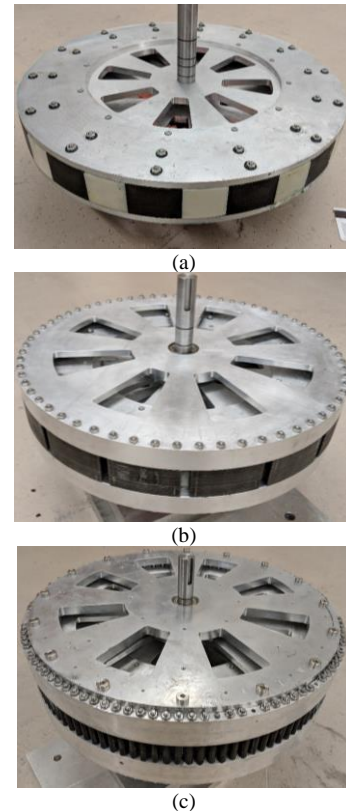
Fully assembled (a) inner rotor (b) inner and cage rotors and (c) magnetic gearbox.
